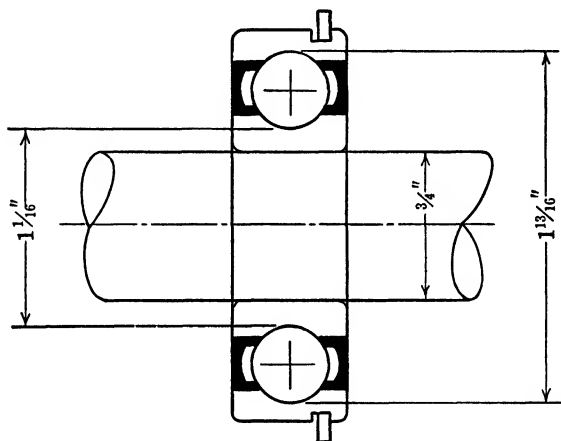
Relative Diameters of Inner and Outer Ball Tracks.
